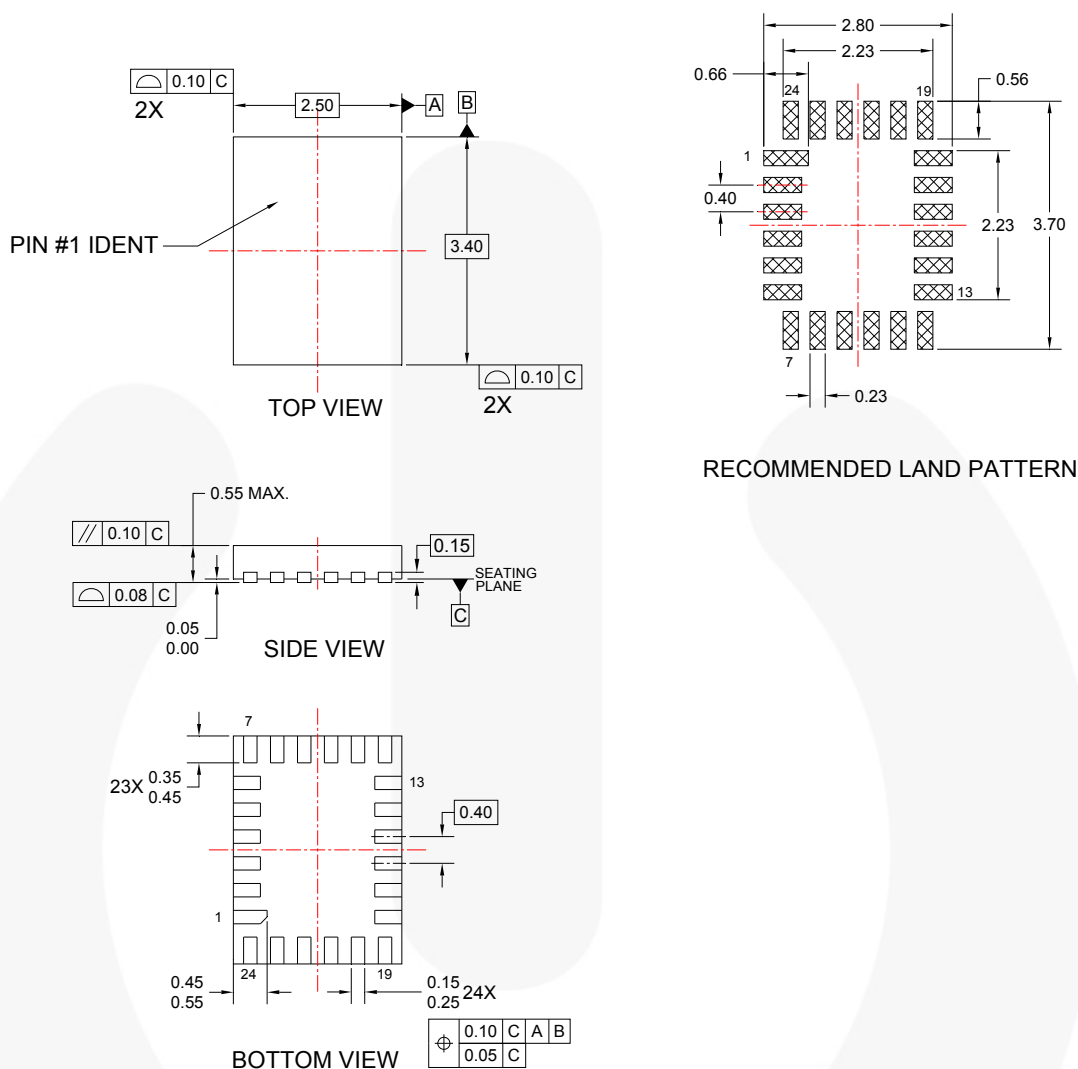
24-Lead, Molded Leadless Package (MLP)
